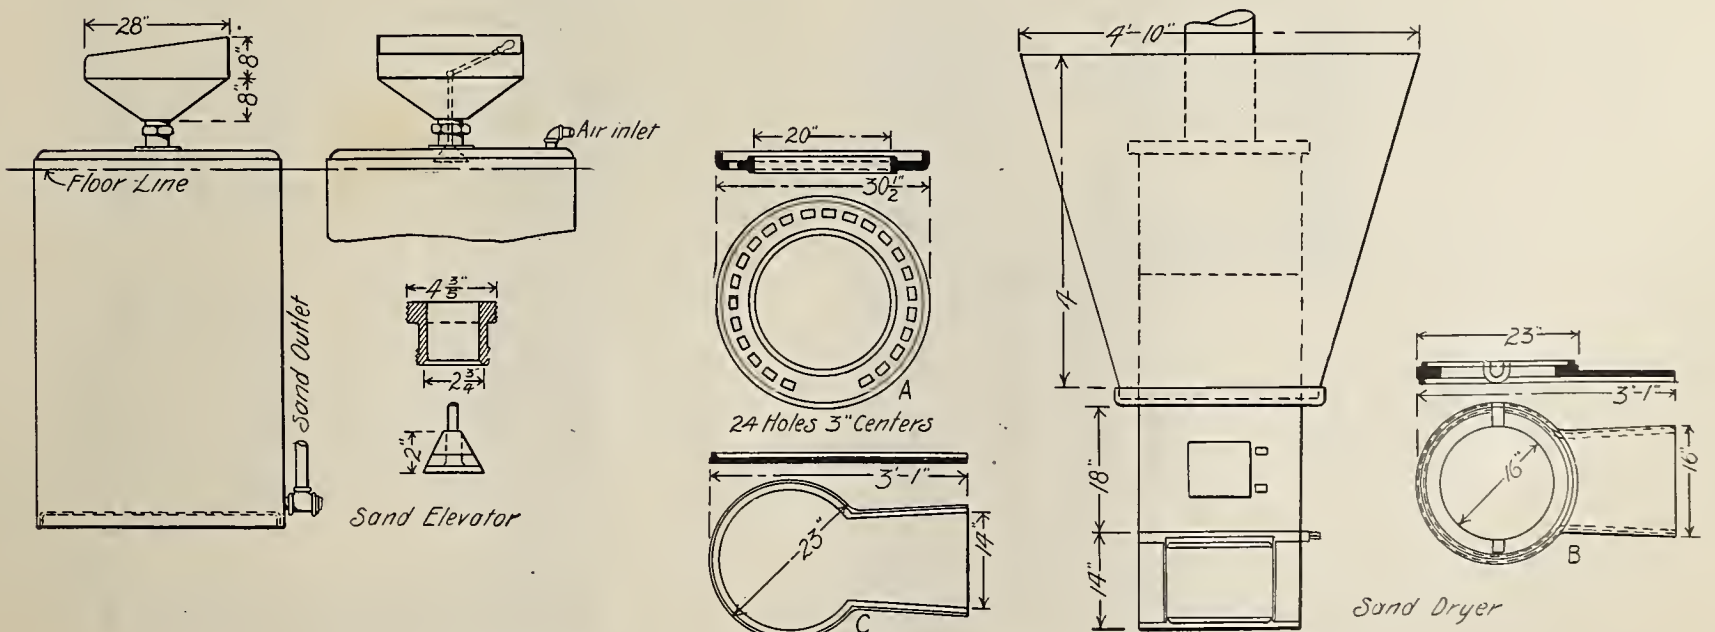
ERIE RAILROAD STOVE SAND DRIER AND ELEVATING DRUM.
